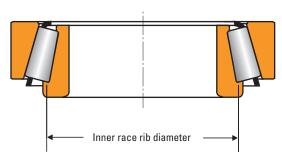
Cone rib diameter. The inner race rib diameter may be scaled from a print.
